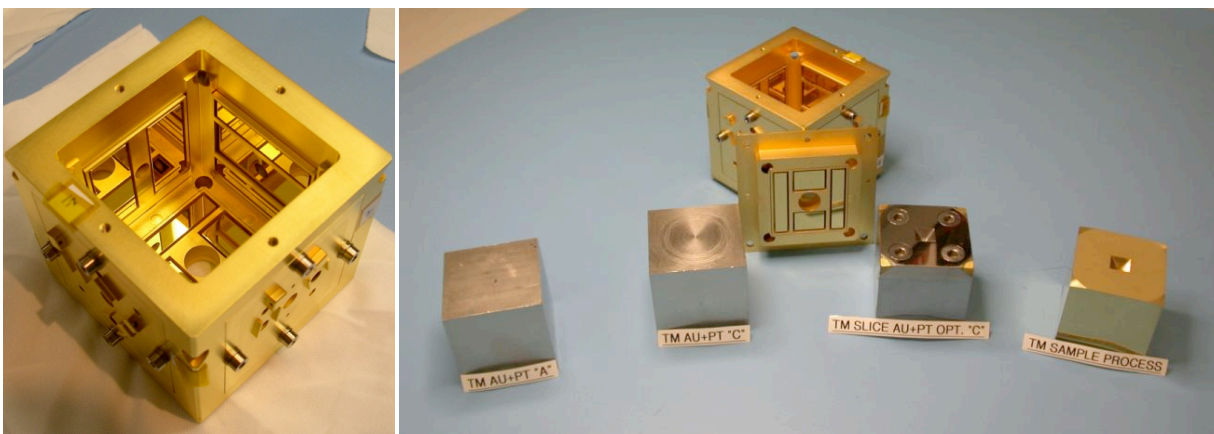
Engineering model of the electrode housing is shown together with examples of the gold platinum PM (bottom from left to right: two flight models before polishing and gold coating. A dummy used for testing of the caging mechanism. A complete model developed to qualify the process).
